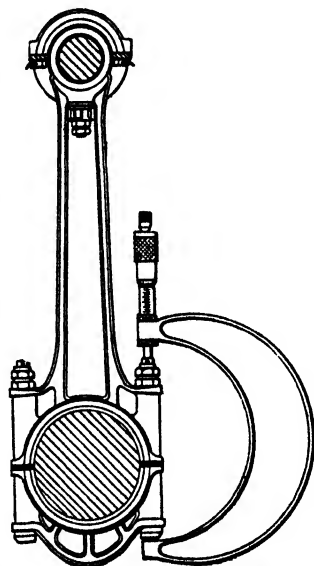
Checking elongation of crankpin-bearing bolts.
